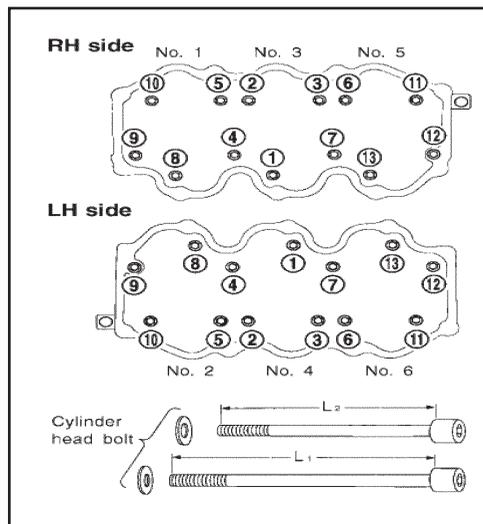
Install the washers between the bolts and cylinder head with the washer beveled side up on Nissan 3.3L engine.
